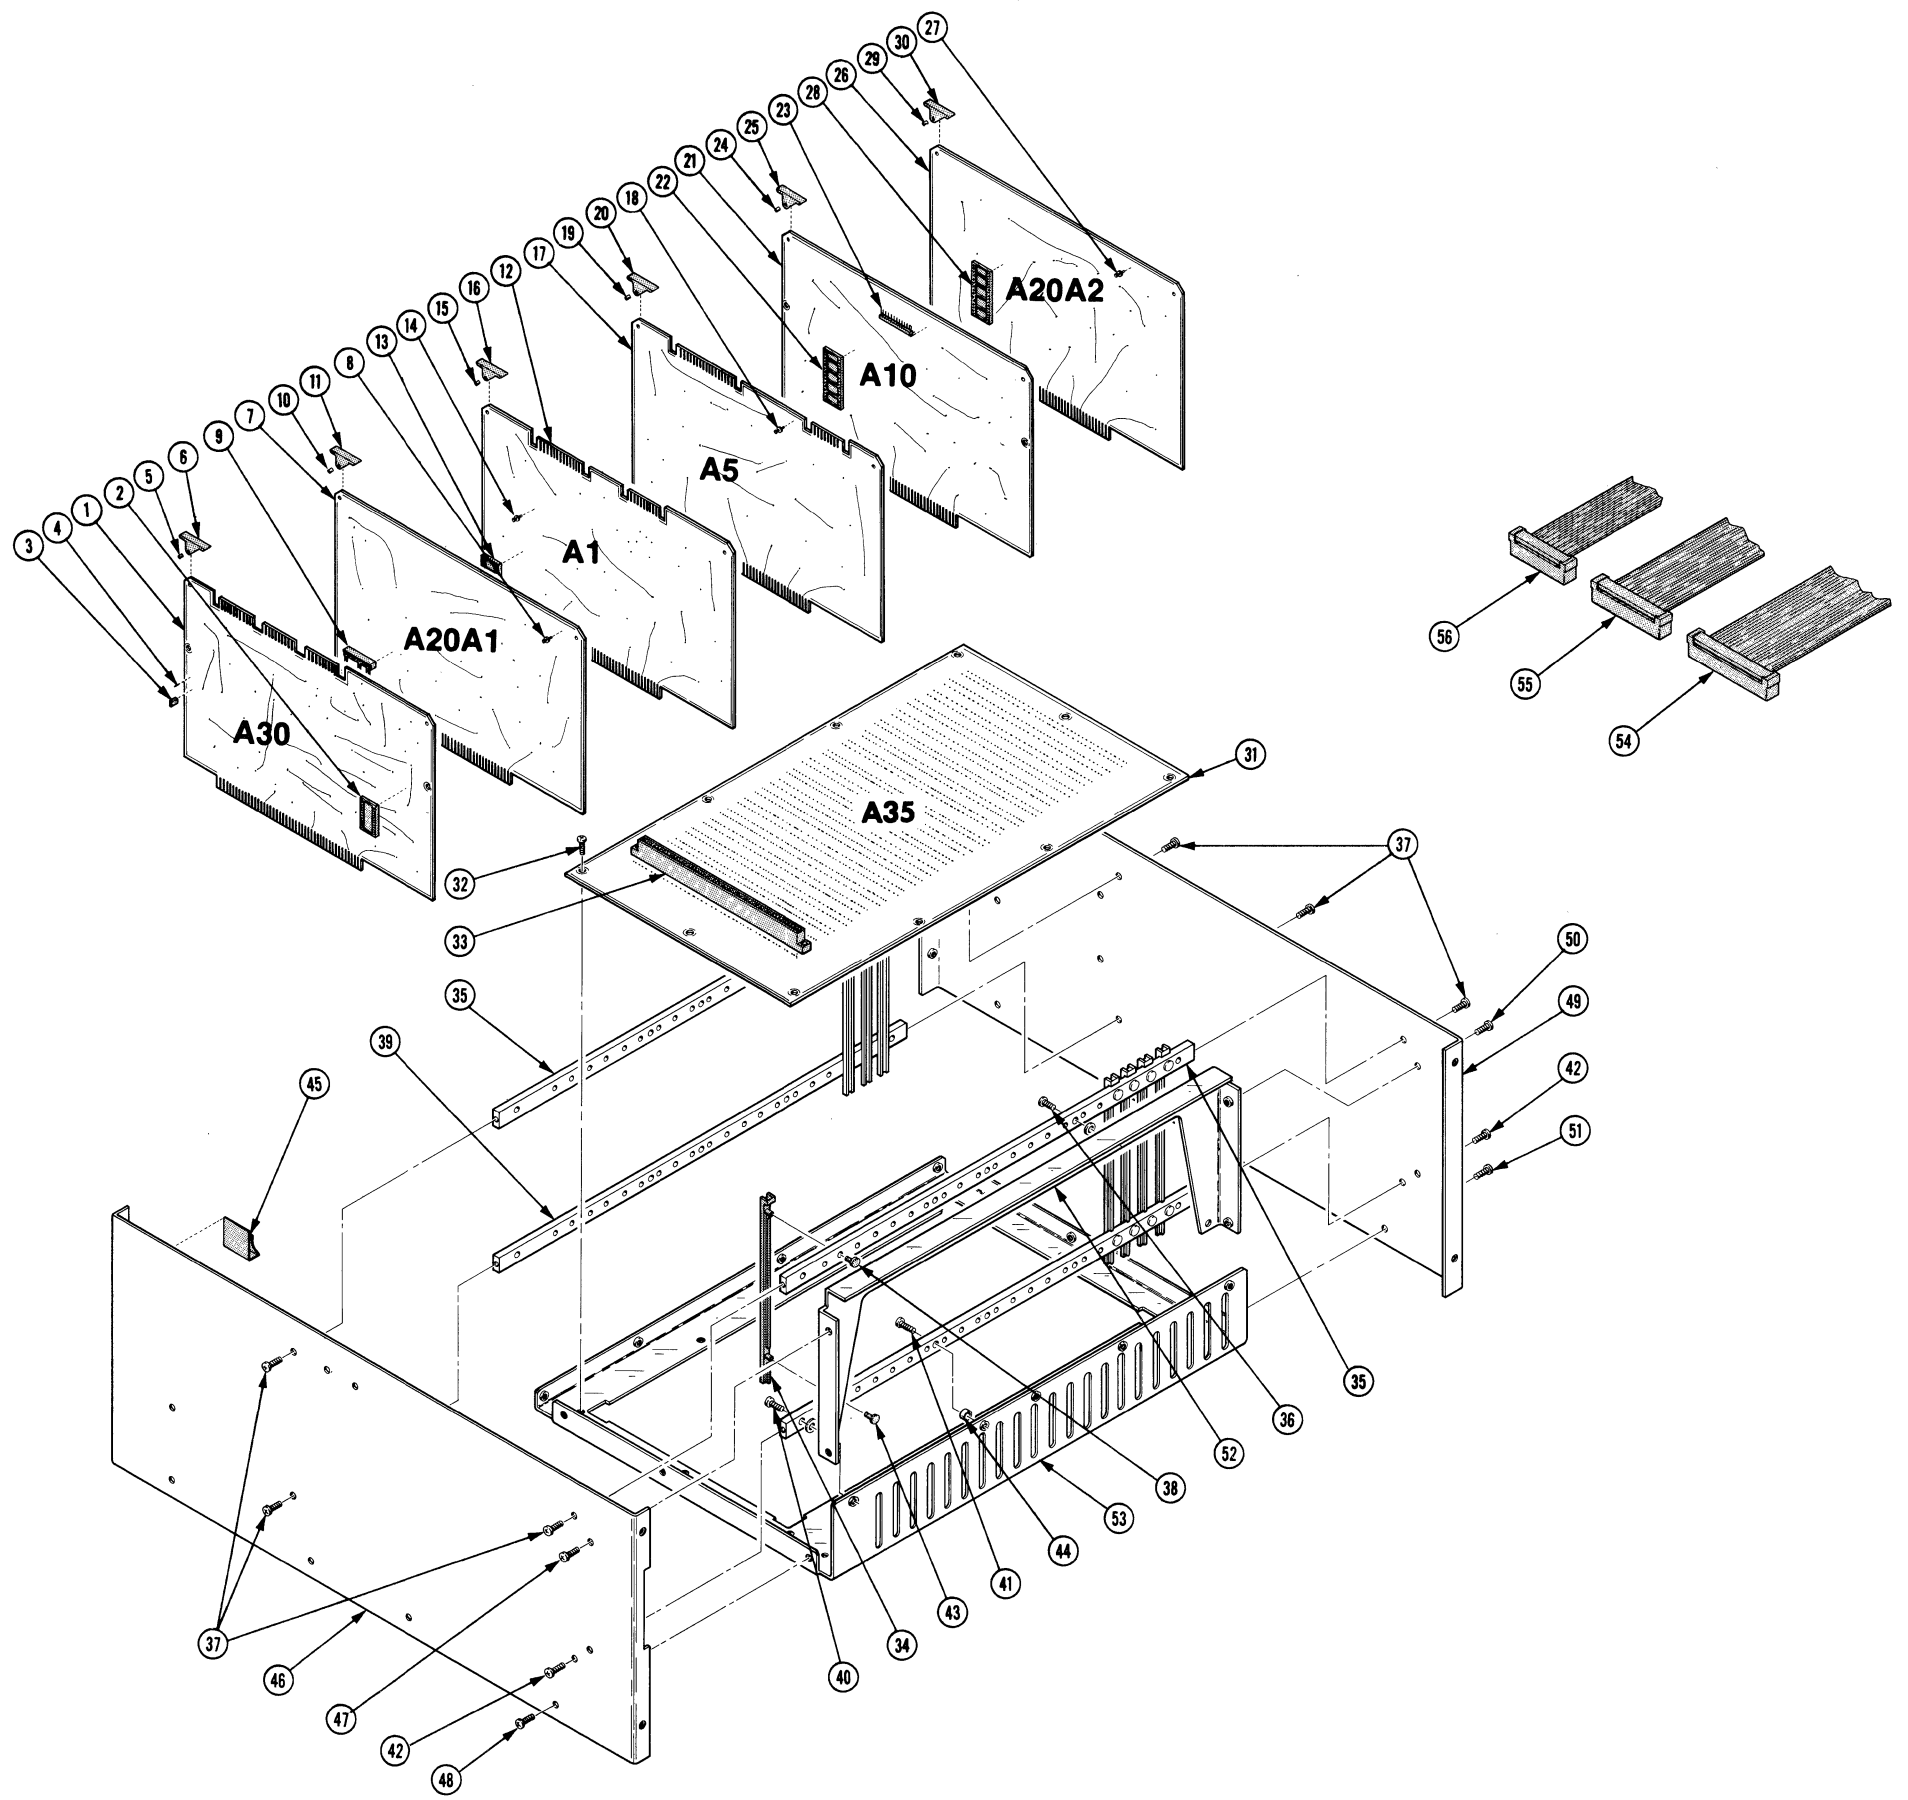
CARD CARRIAGE & CIRCUIT BOARDS
